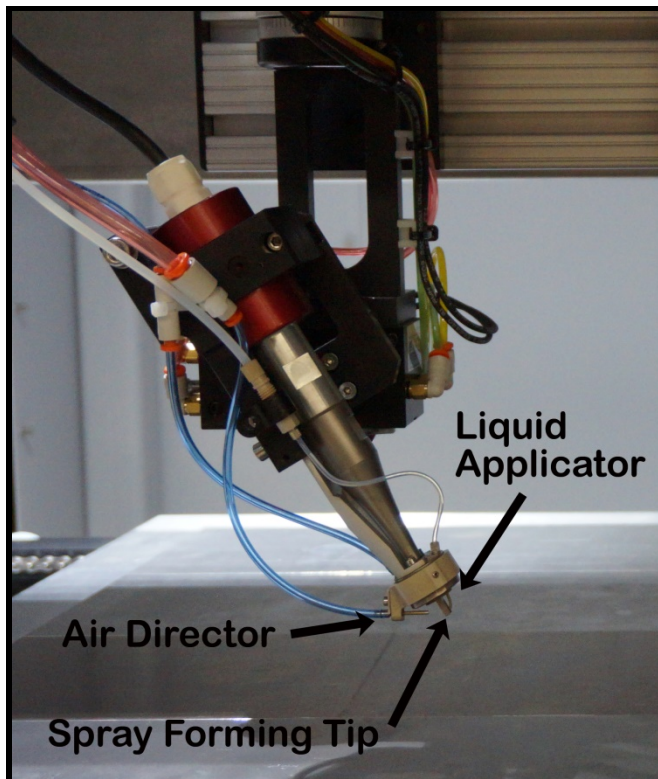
Nozzle-Less Ultrasonic Spray head Assembly
